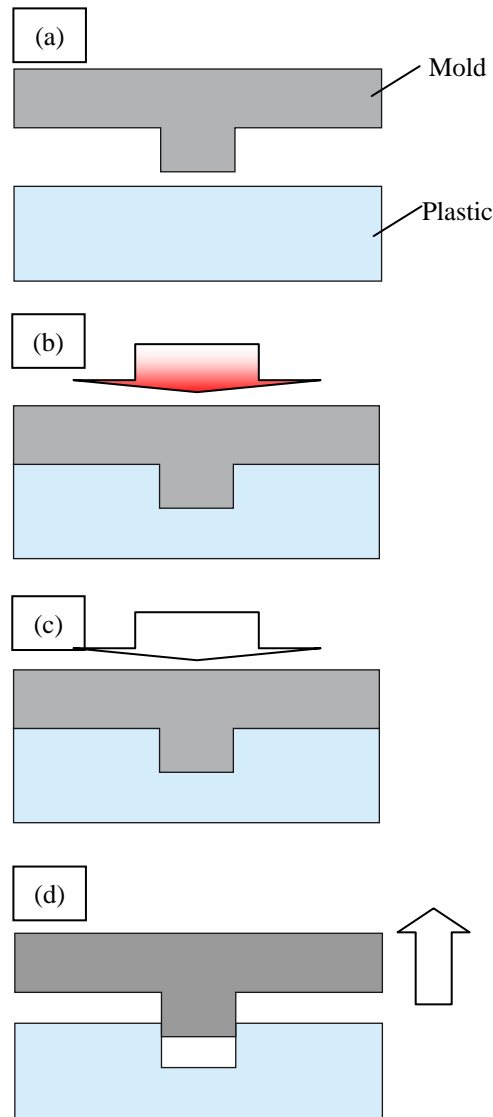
Schematic diagram of hot embossing process; (a) heating mold and plastic, (b) pressing mold and holding, (c) cooling and holding, and (d) demolding.
